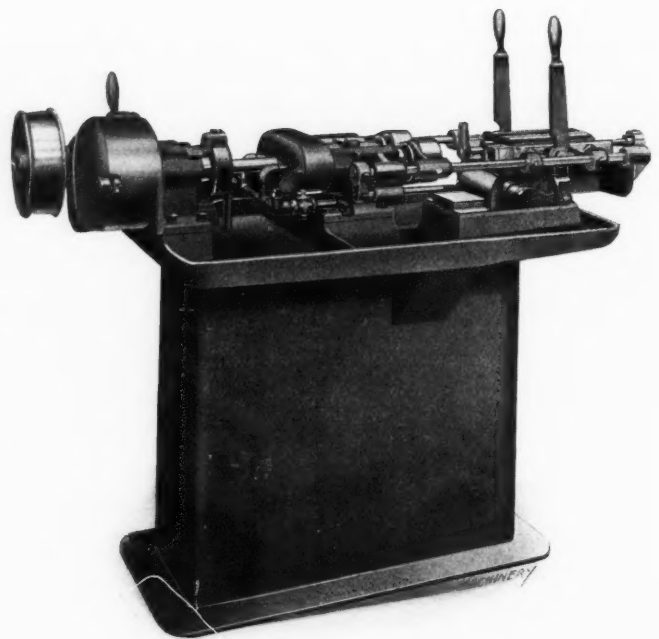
National-Acme Two-spindle No. 2 Bolt Threader
